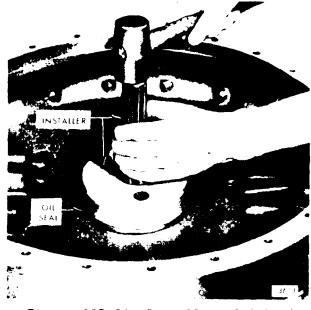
B-84. Installing Oil Seal in Flywheel Housing
